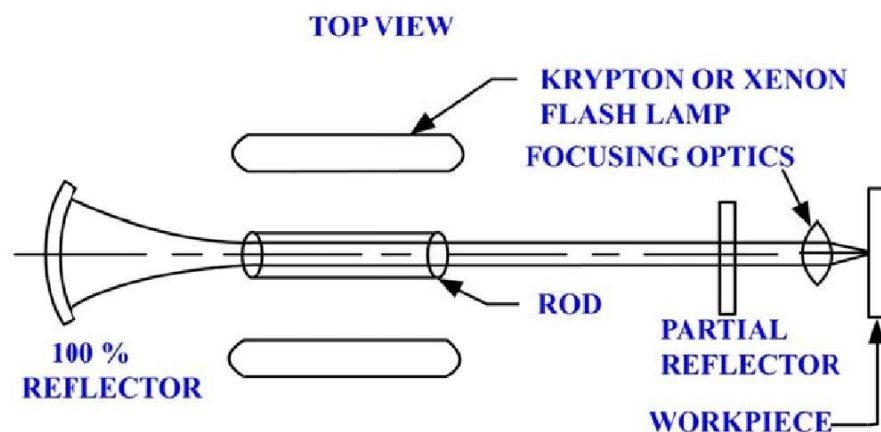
Schematic of laser rod, lamp and mirror used in laser beam welding.
